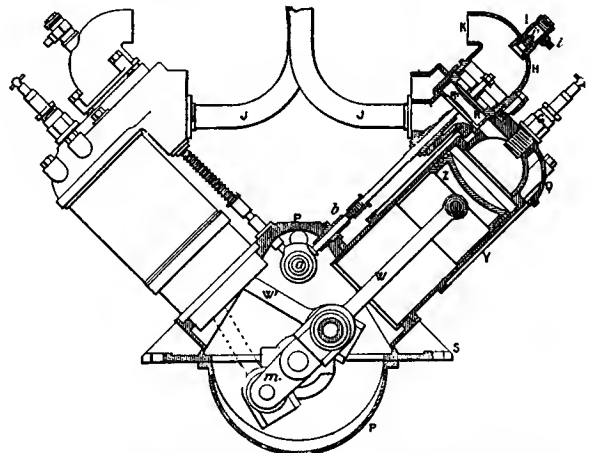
Section of Antoinette Eight-Cylinder Aeronautical Engine. Z Piston; R Automatic Inlet Valve; R' Mechanical Exhaust Valve; K Air Inlet; J Exhaust Manifold; A Camshaft; Y Copper Water Jacket.
